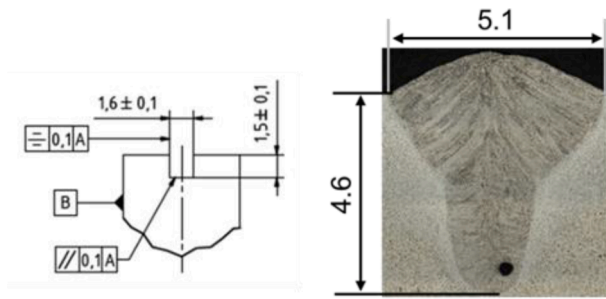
Seam preparation for the similar and dissimilar welding trials as well as the resulting weld geometry.
